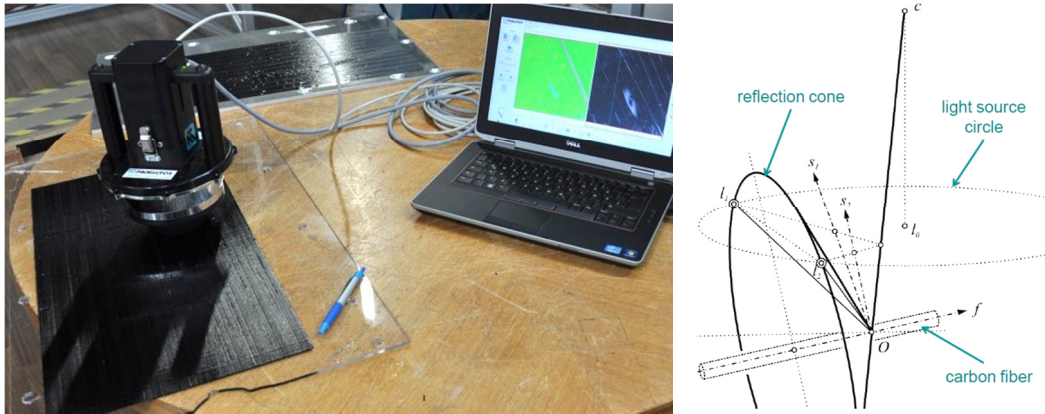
Measurement using the PROFACTOR fiber angle sensor
